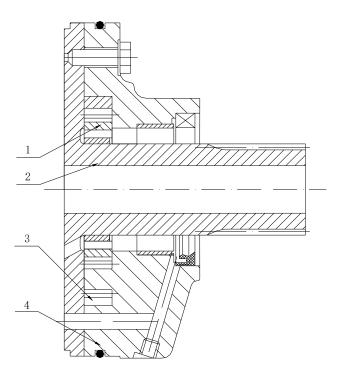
YQX30-3000 oil supply pump assembly structure diagram
